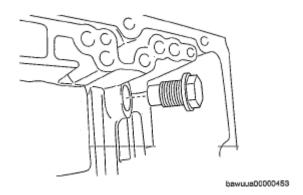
Identifying Brake Band Anchor Bolt Courtesy of MAZDA MOTORS CORP.
